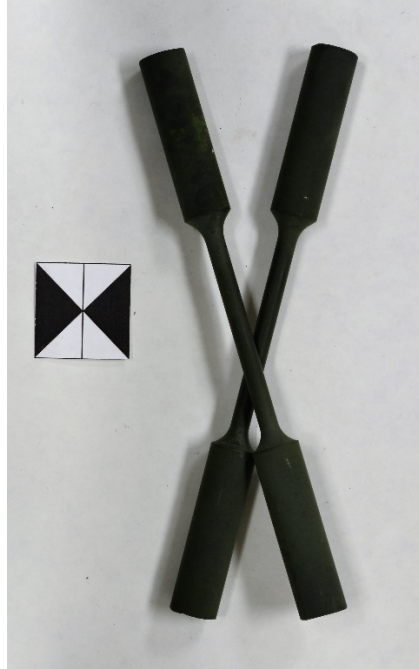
Wrought IN625 Tensile Test Samples: annealed
